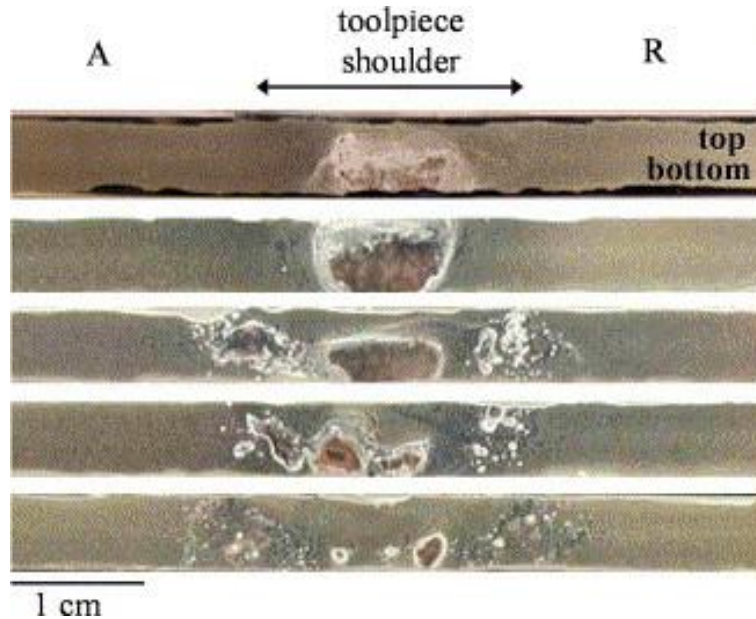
Corrosion attack on cross section of FSW nugget: A is advancing side and R is retreating side [43].
